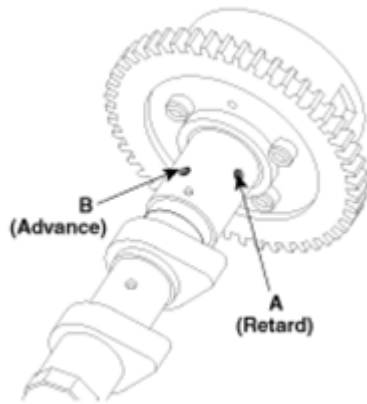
Identifying CCVT Retard And Advance Hole (Exhaust)
